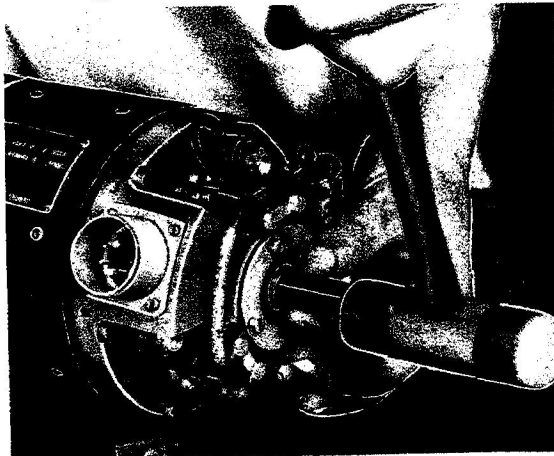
Separation of Armature Assembly, Pencil Drive Shaft and Back Head, as a Unit, From the Yoke and Front Head Assemblies
